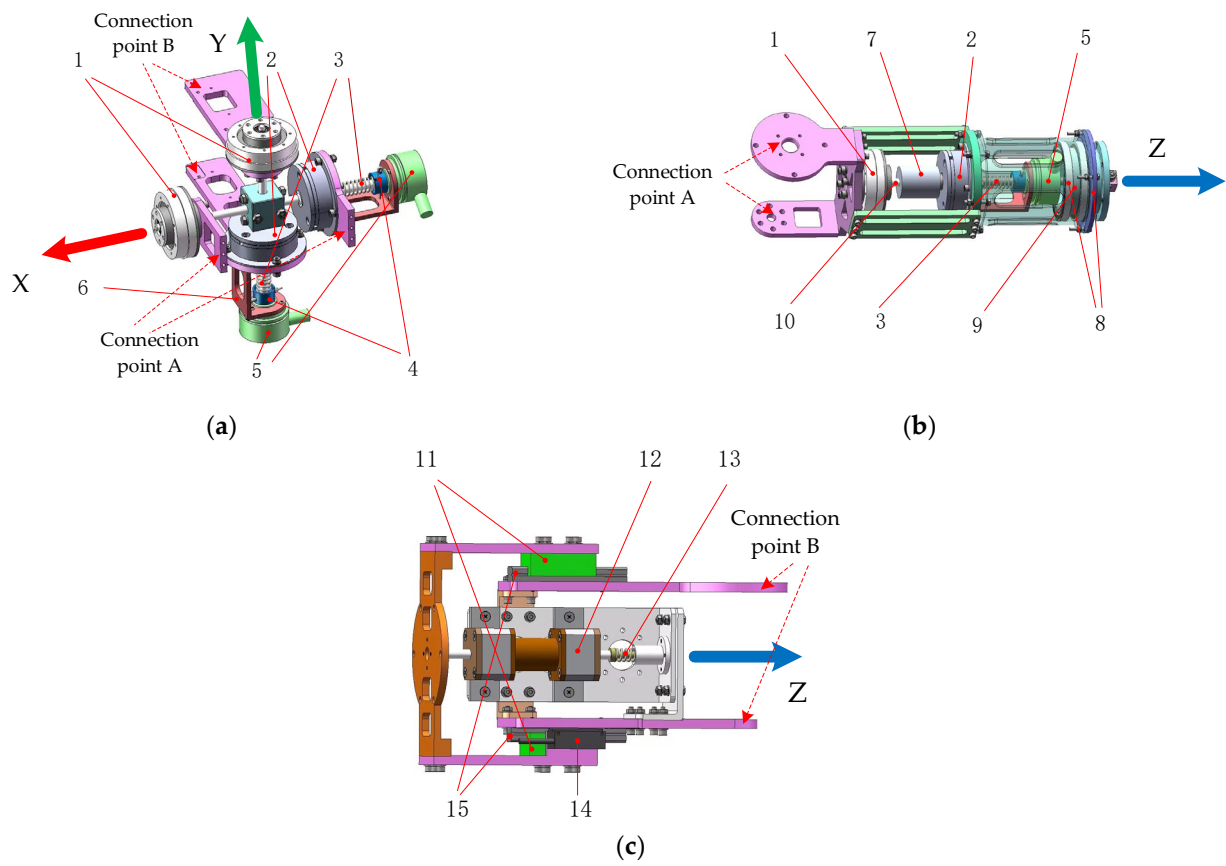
The exploded drawing of the controllable damping mechanism with cross-axis structure; (a) rotary x -axis and rotary y -axis joint of cross-axis structure; (b) rotary z axis of cross-axis structure; (c) sliding z structure; 1. rotating MR damper; 2. electromagnetic clutch; 3. torsion spring; 4. torsion spring fixings; 5. encoder; 6. bracket; 7. coupling; 8. deep-groove ball bearing; 9. sleeve; 10. damping z axis; 11. electromagnetic brake slider; 12. linear MR damper; 13. linear spring; 14. linear displacement sensor; 15. slide rail.
